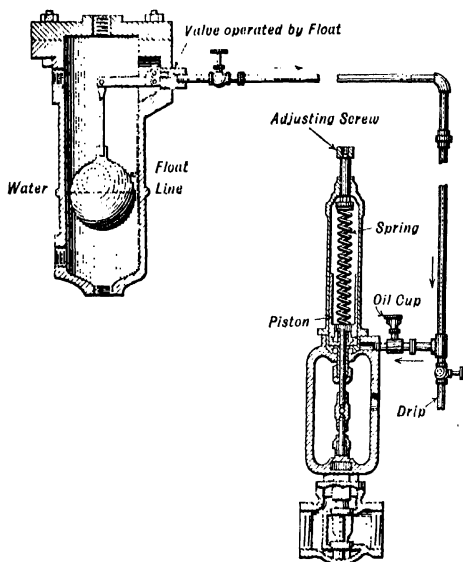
Sectional View of Murray Automatic Boiler Feed Regulator.
